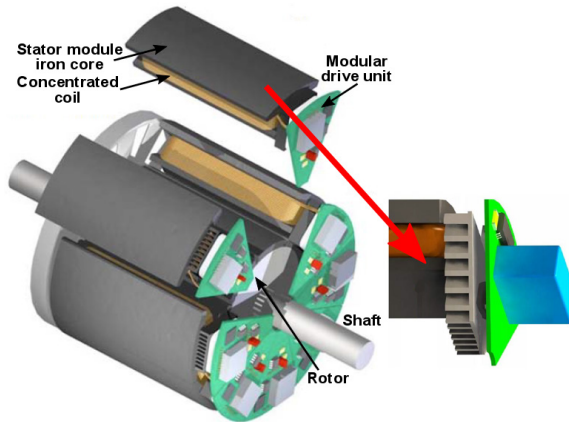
The integrated modular motor drive (IMMD) concept [53]
